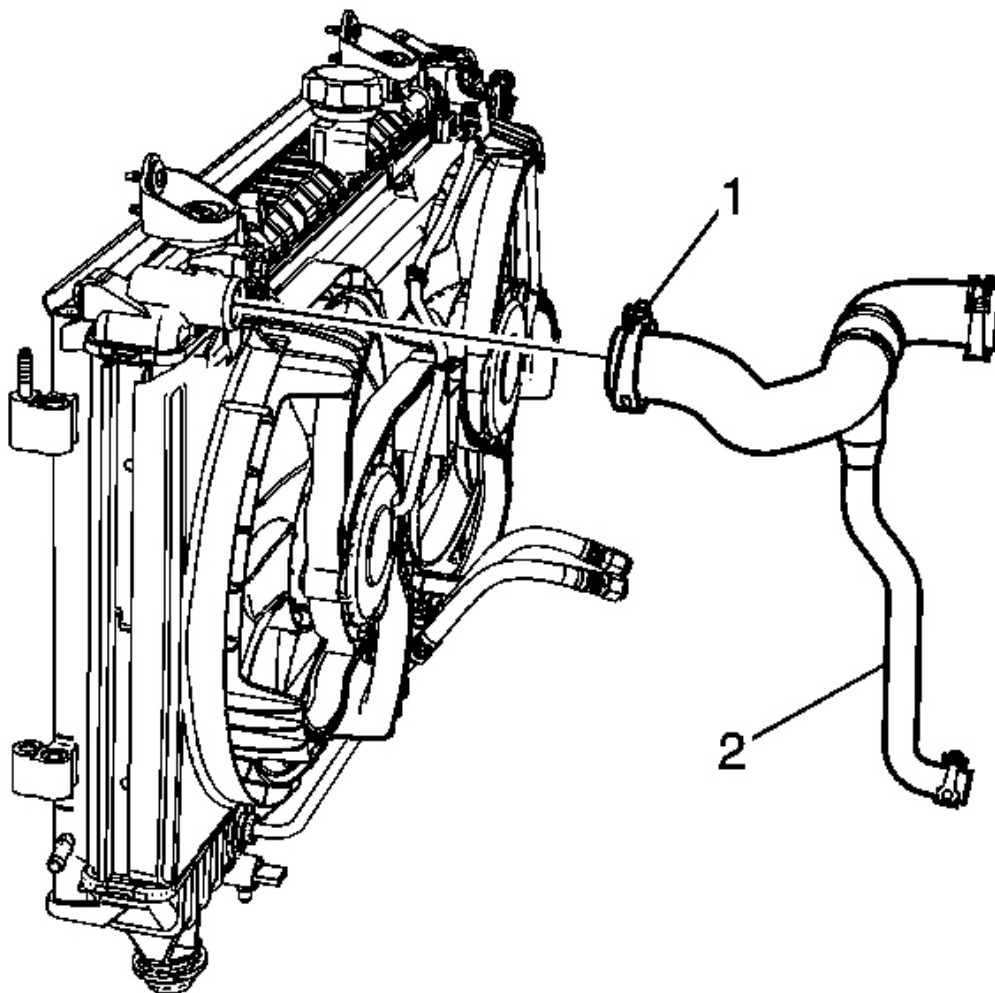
Radiator Inlet Hose & Clamp At Radiator
